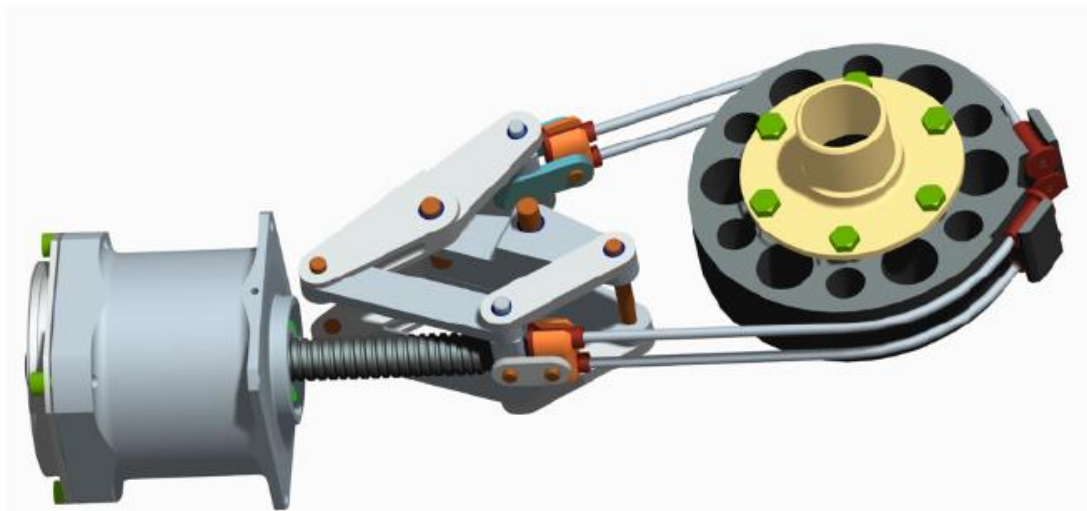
PERCRO actuator unit without the case to show the internal mechanism [6]
